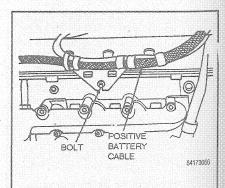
Positive battery cable retaining bolt location—4.6L engine
